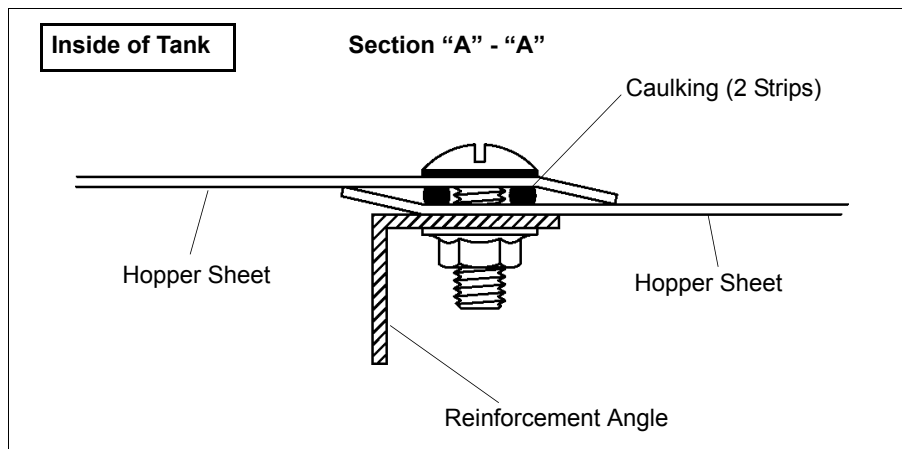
F Hopper Overlap and Bolt Detail W/Reinforcement Angle
